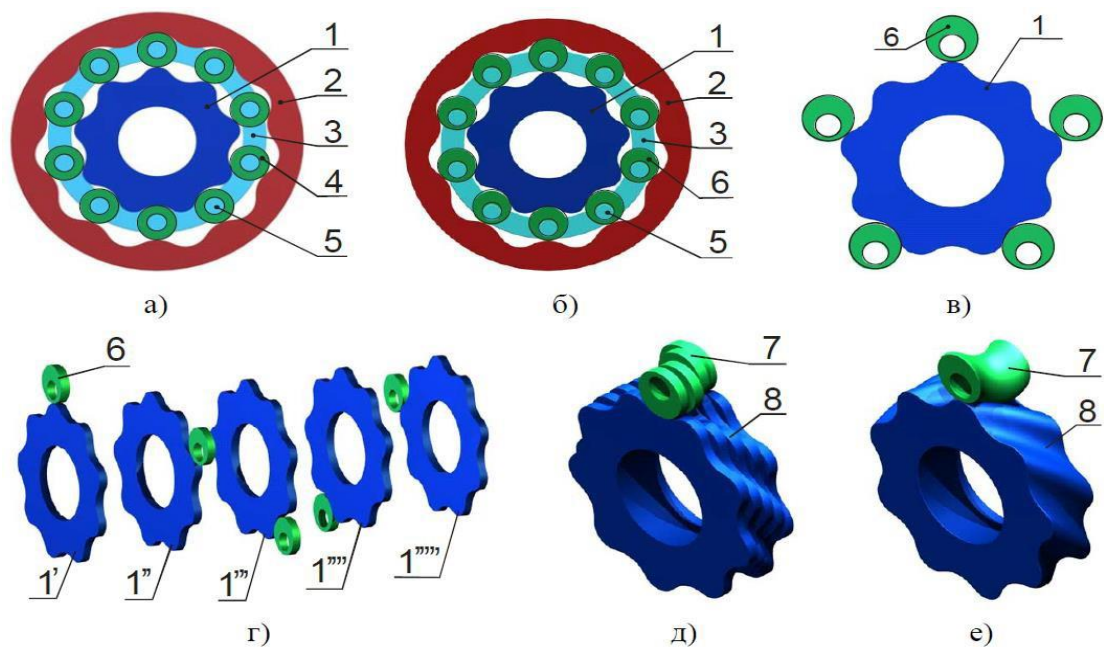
The principle of EC engagement: 1 - the driven wheel of external engagement, 2 – the support wheel of internal engagement, 3 – the cage sitting on the drive shaft with an eccentric, 4 – rollers, 5 – fingers, 6 – eccentrics, 1, 1', 1'', 1''', 1'''' – sections of the driven wheel, 7 – gear, 8 – gear wheel; a) Braren gearbox, b) and c) modification of the Braren gearbox with eccentric rollers, d) wheels obtained by the cross section of the driven wheel of the Braren gearbox, e) EC-engagement of composite wheels, f) curved EC-engagement.
